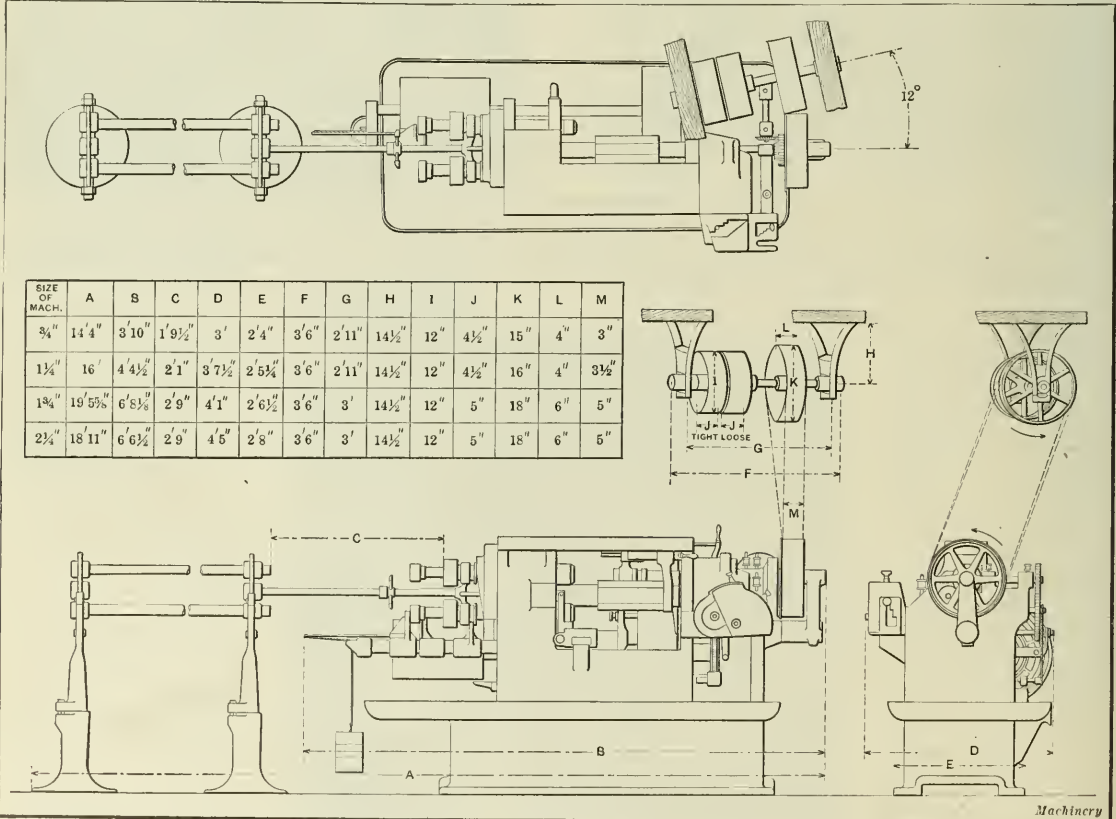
Setting-up Plan and Overhead Works for Gridley Multiple-spindle Automatic Screw Machine
